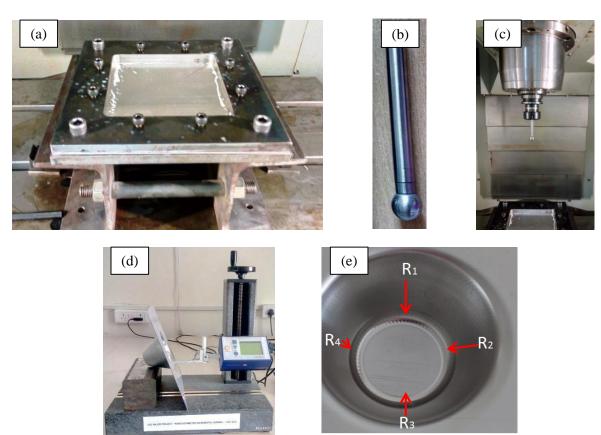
(a) Forming fixture, (b) forming tool, (c) the setup and (d) profilometer (e) direction of surface roughness measurement
